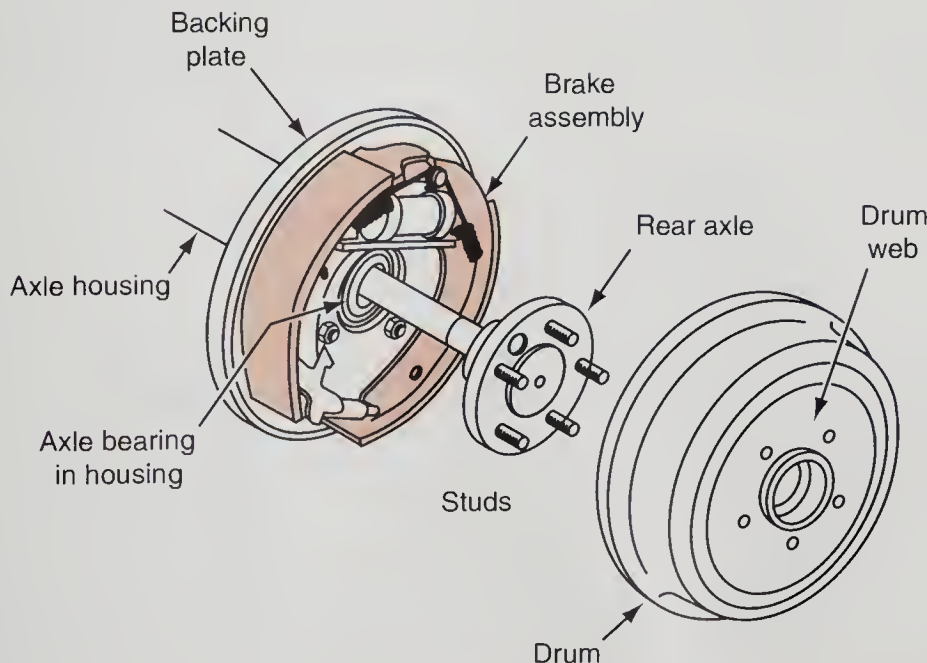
Drum removed with the axle partially withdrawn. Shown is the general layout of RWD axle and brake drum.
